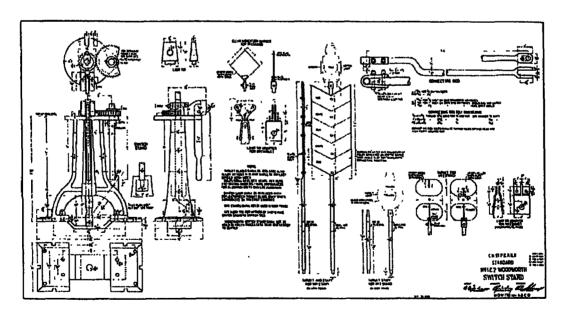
Standard Milwaukee Road track switch stand (author's collection).
